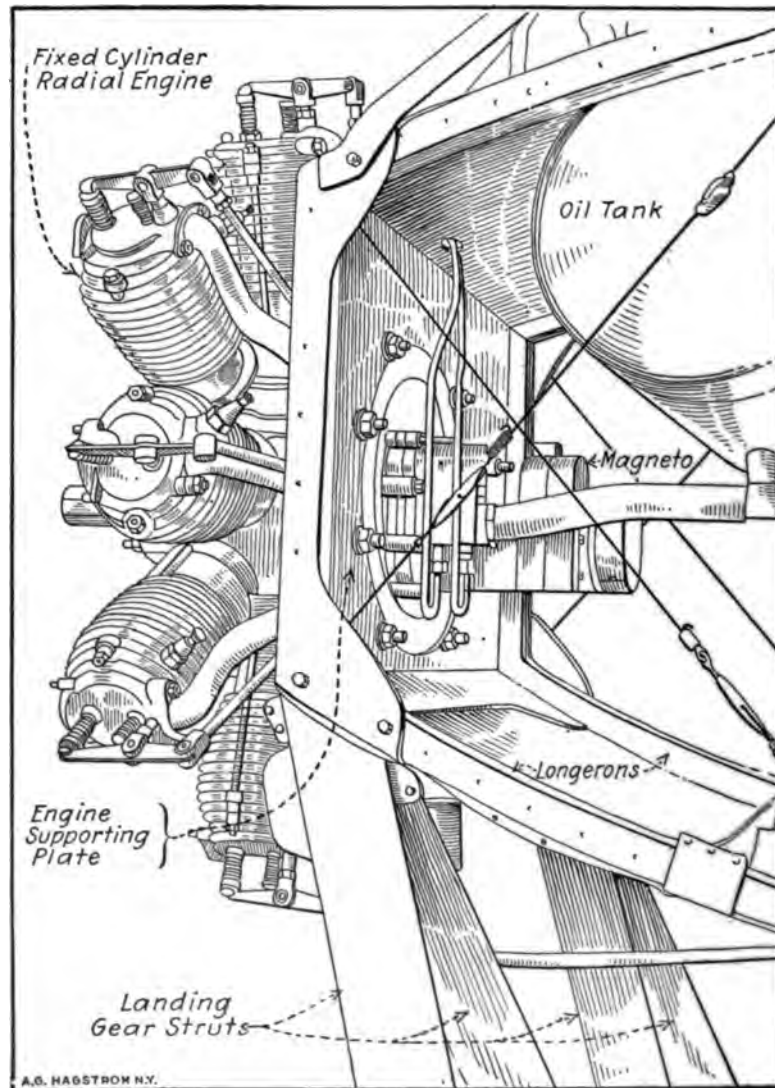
Anzani Ten-Cylinder Engine Installed in Fuselage.
